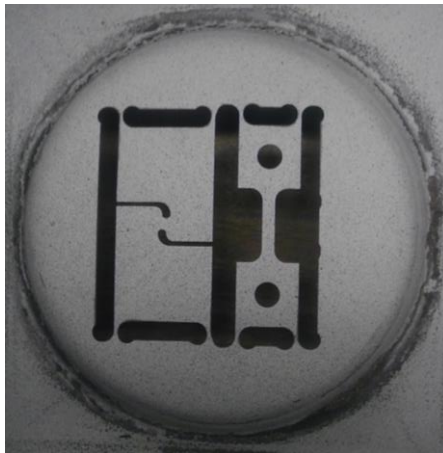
Specimens machined from centre section of biaxially pre-stained blank
